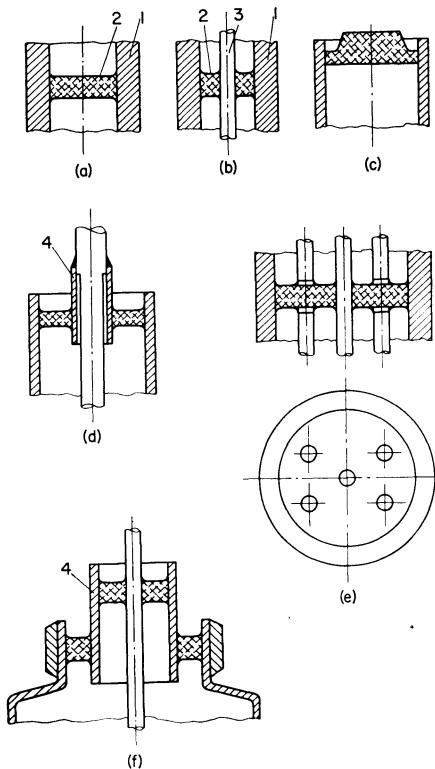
Compression seals; (a) window seal; (b) rod seal; (c) specially shaped window seal; (d) pipe seal; (e) multiple rod seal; (f) rod and double ring seal. (1) metal ring; (2) glass window; (3) metal rod; (4) metal tube
